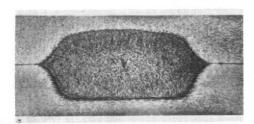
Spot weld in stainless steel (D.T.D.171).
